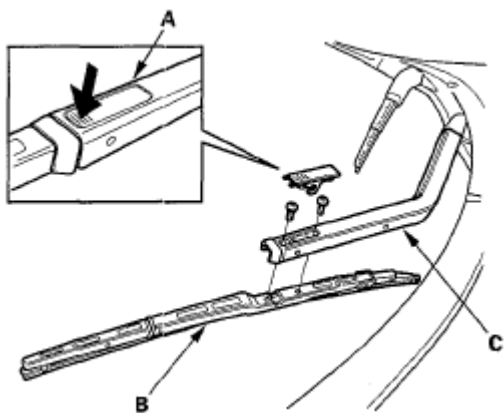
Identifying Wiper Blade, Wiper Arm And Cover
